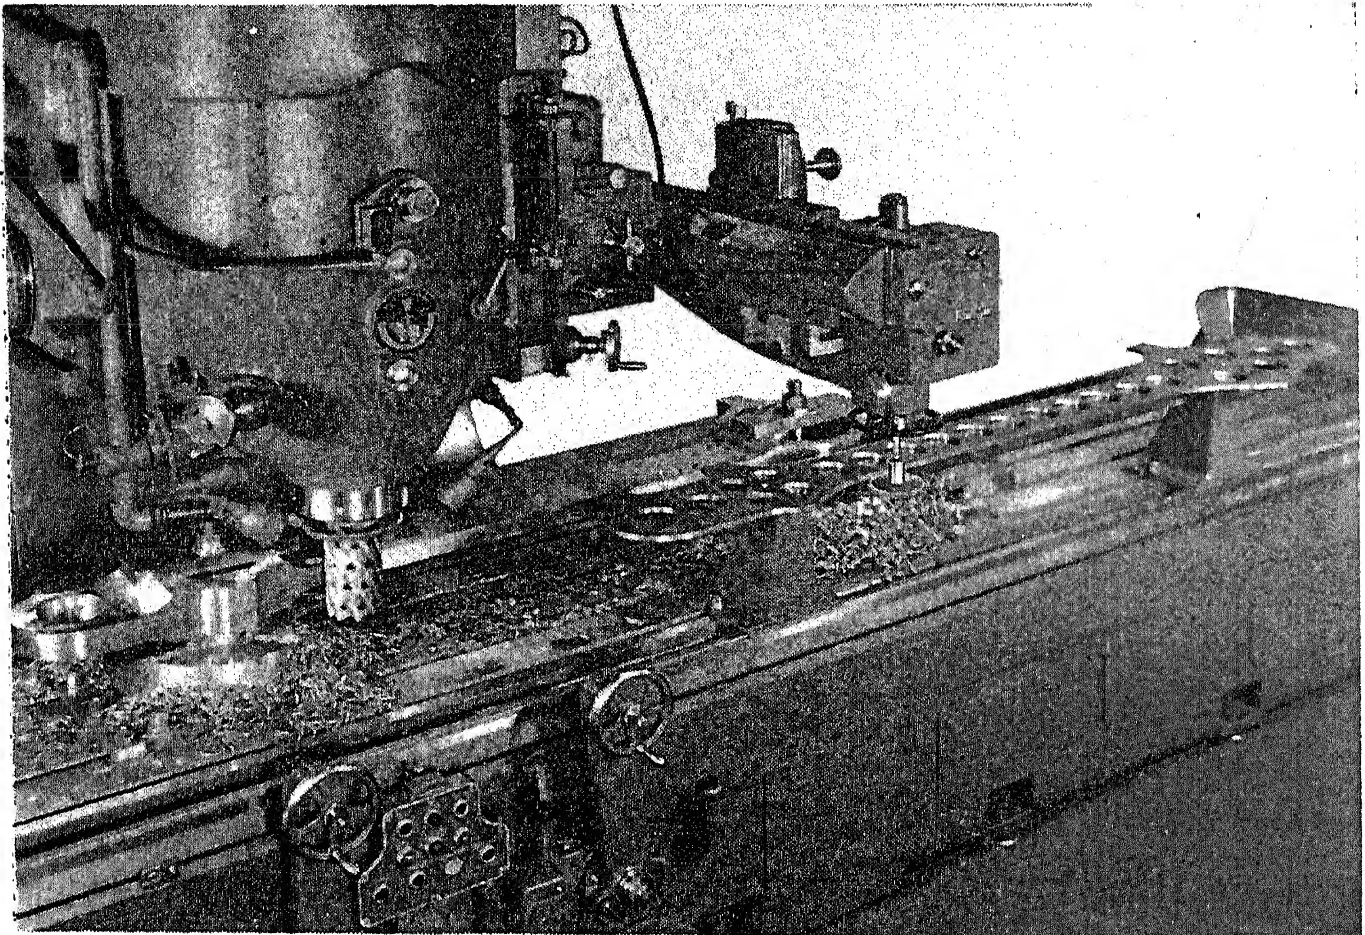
A 36 in. vertical Hydrotel milling machine with 360° automatic profiling unit. (Courtesy The Cincinnati Milling Machine Co.)
